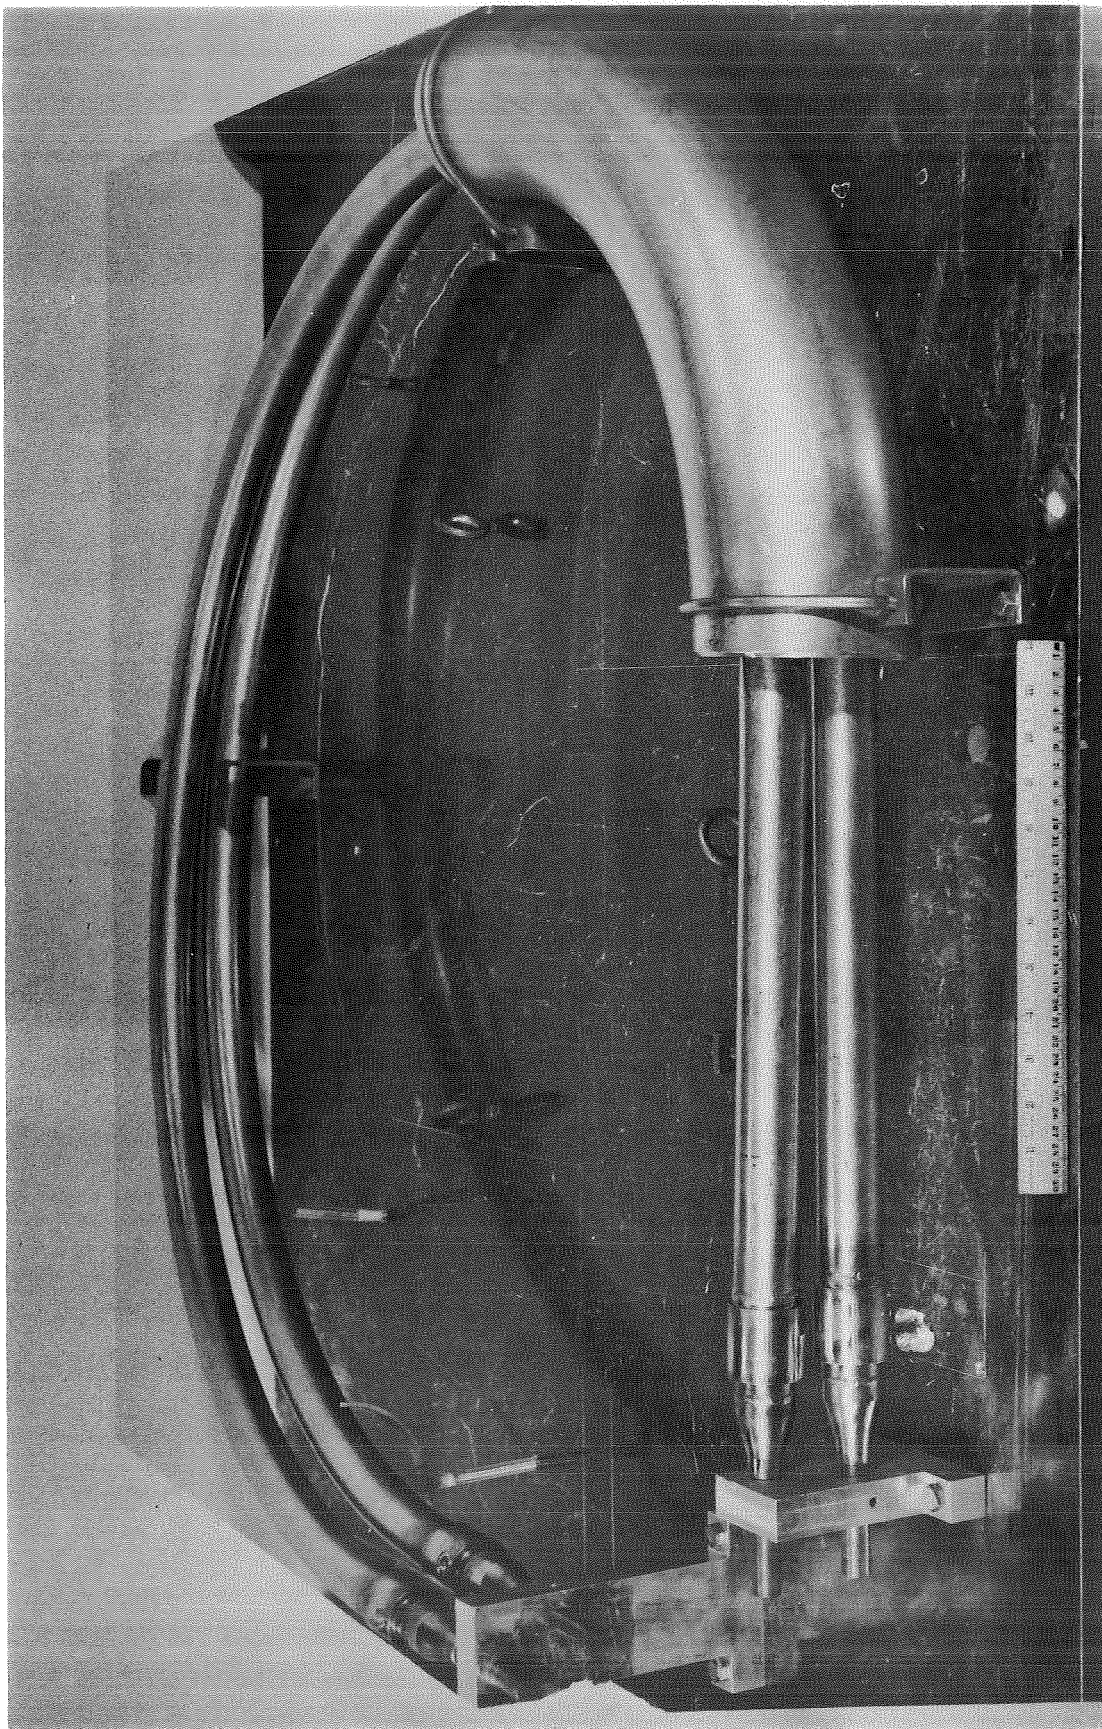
SNAP-8 ALHE Final Assembly Weld Fixture. (P70-4-7B)
